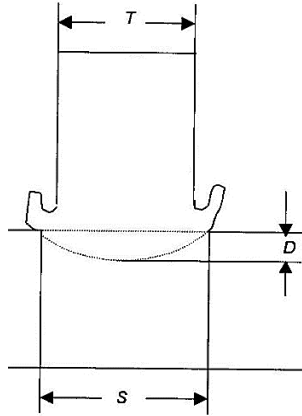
Fin to tube penetration (weld width and weld depth).
